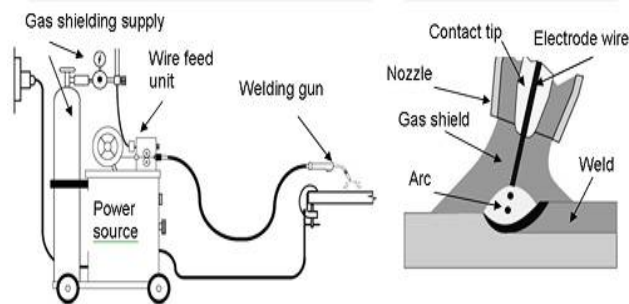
Setup of with Metal Inert Gas Welding
